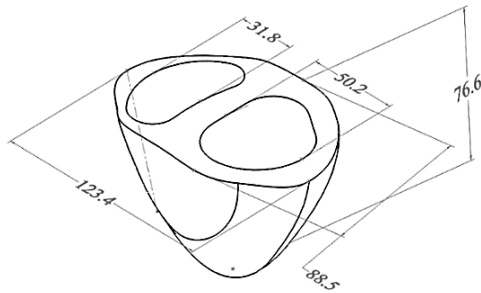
3D view of the heart model (dimensions are in millimeter.)
